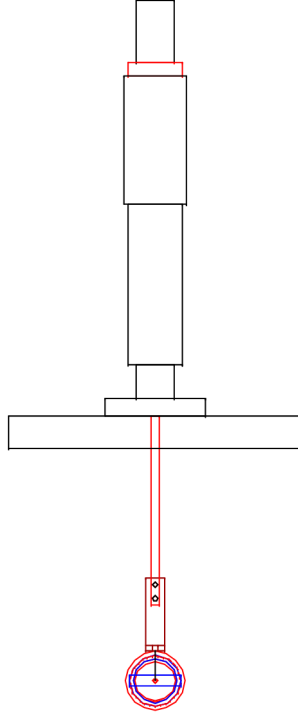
Schematic drawing of assembled pneumatic retractable Faraday cup.
